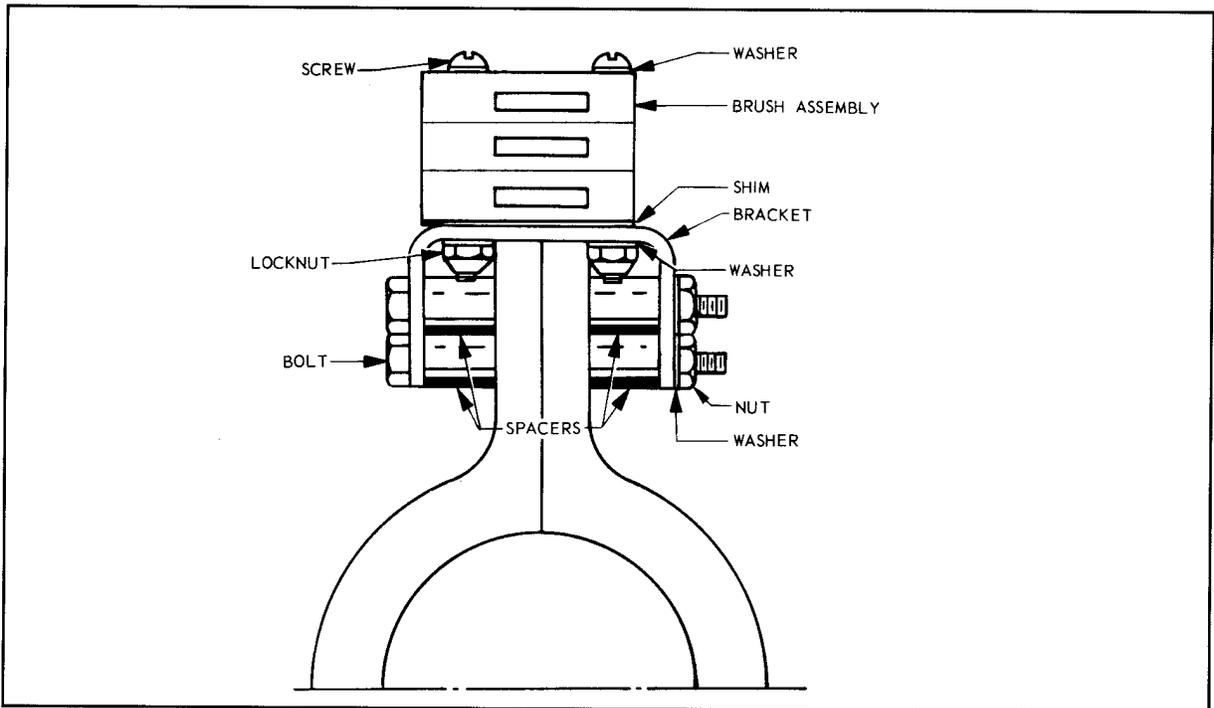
Typical Brush Assembly Mounting Bracket Installation
